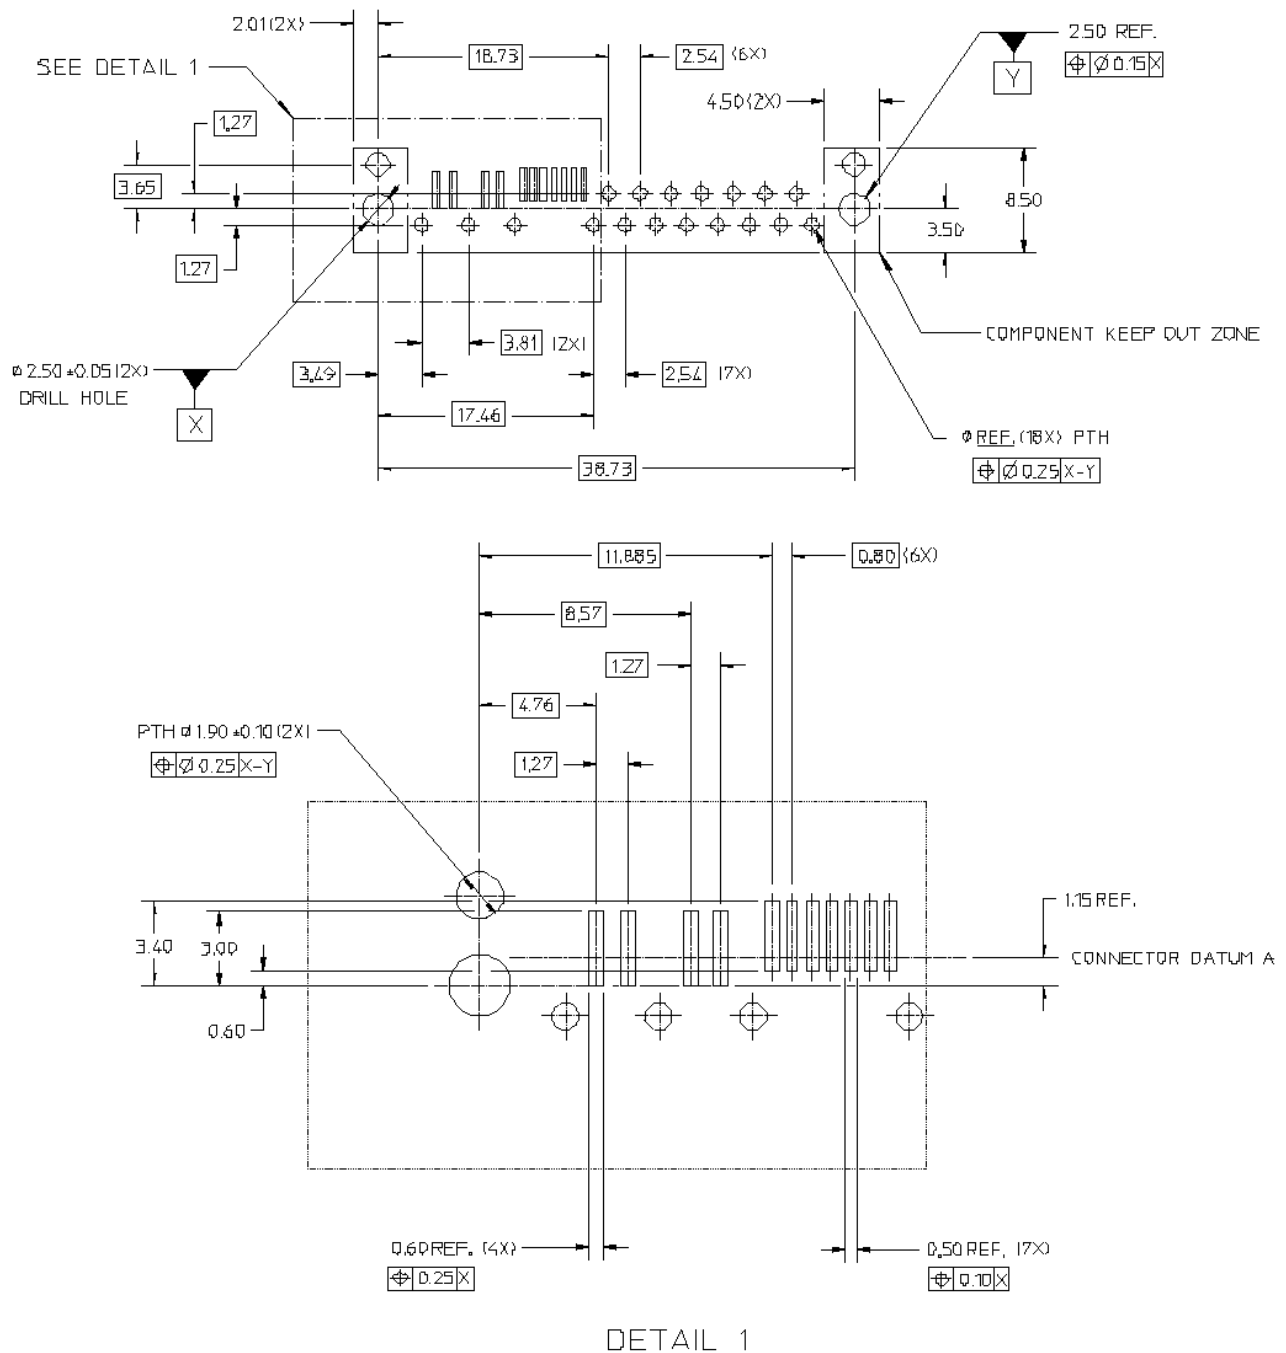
SURFACE MOUNT PRINTED CIRCUIT BOARD DETAIL
